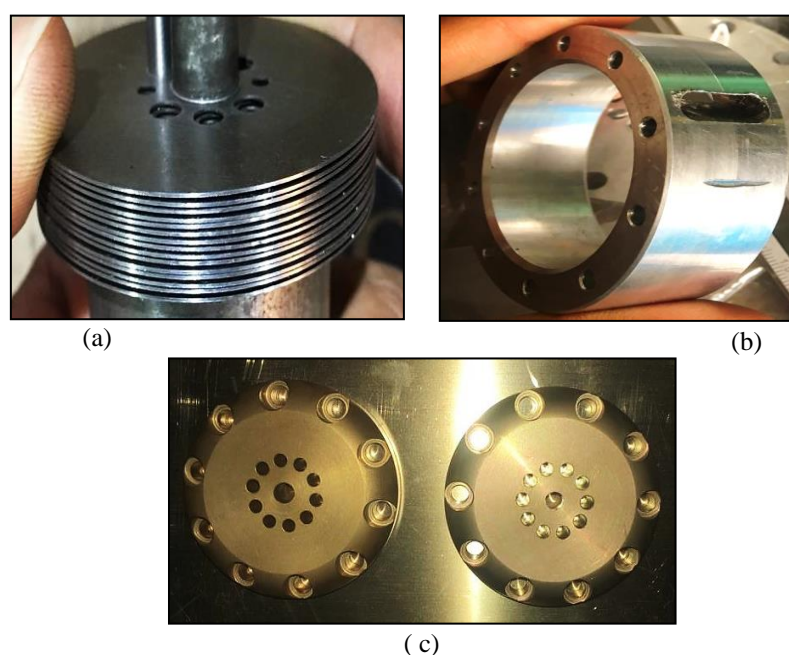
Assembly (a) 48 mm diameter disc assembled; (b) Casing with inlet nozzle; (c) Anodized casing with exhaust holes
